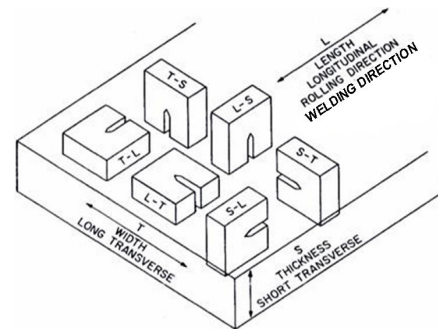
Terminology used for orientations of cracking planes in the test specimens with respect to the rolling and welding.
